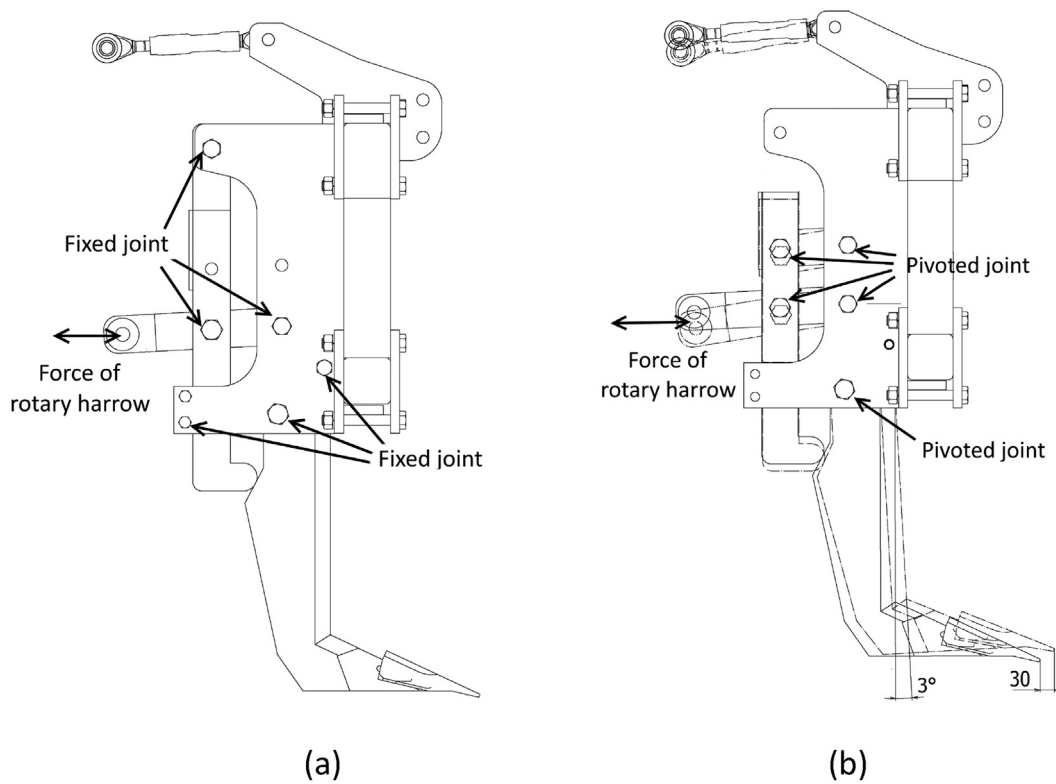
Linkage configurations: (a) On-frame pivot joint, and (b) On-pivotable shank joint.
